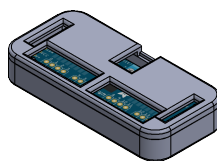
Adafruit 815 servo controller in 3D printed casing
